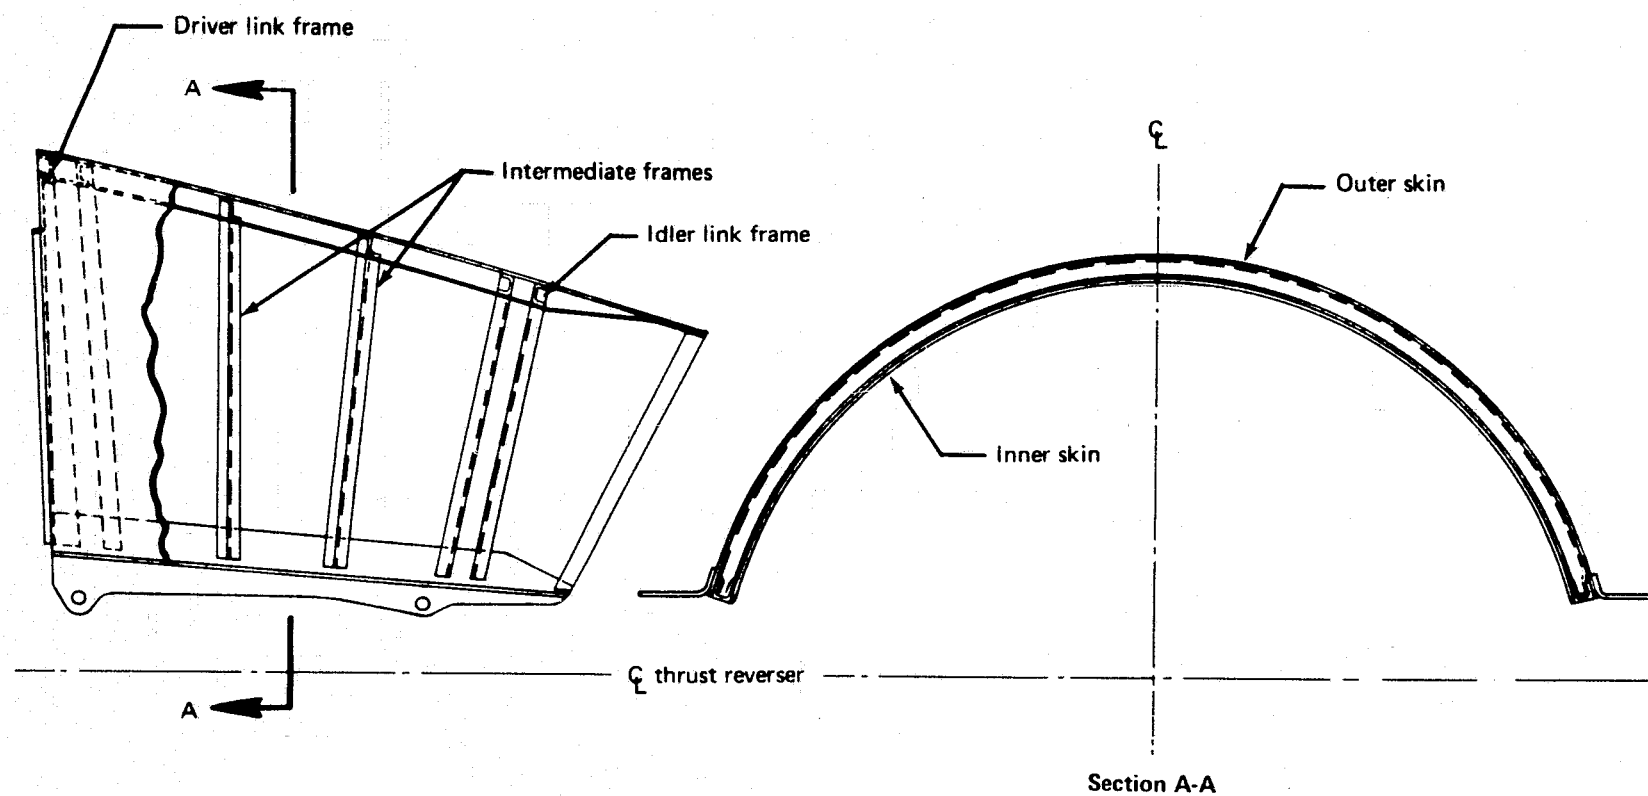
Thrust-Reverser Door Construction Trade Study—Double Skin Door
